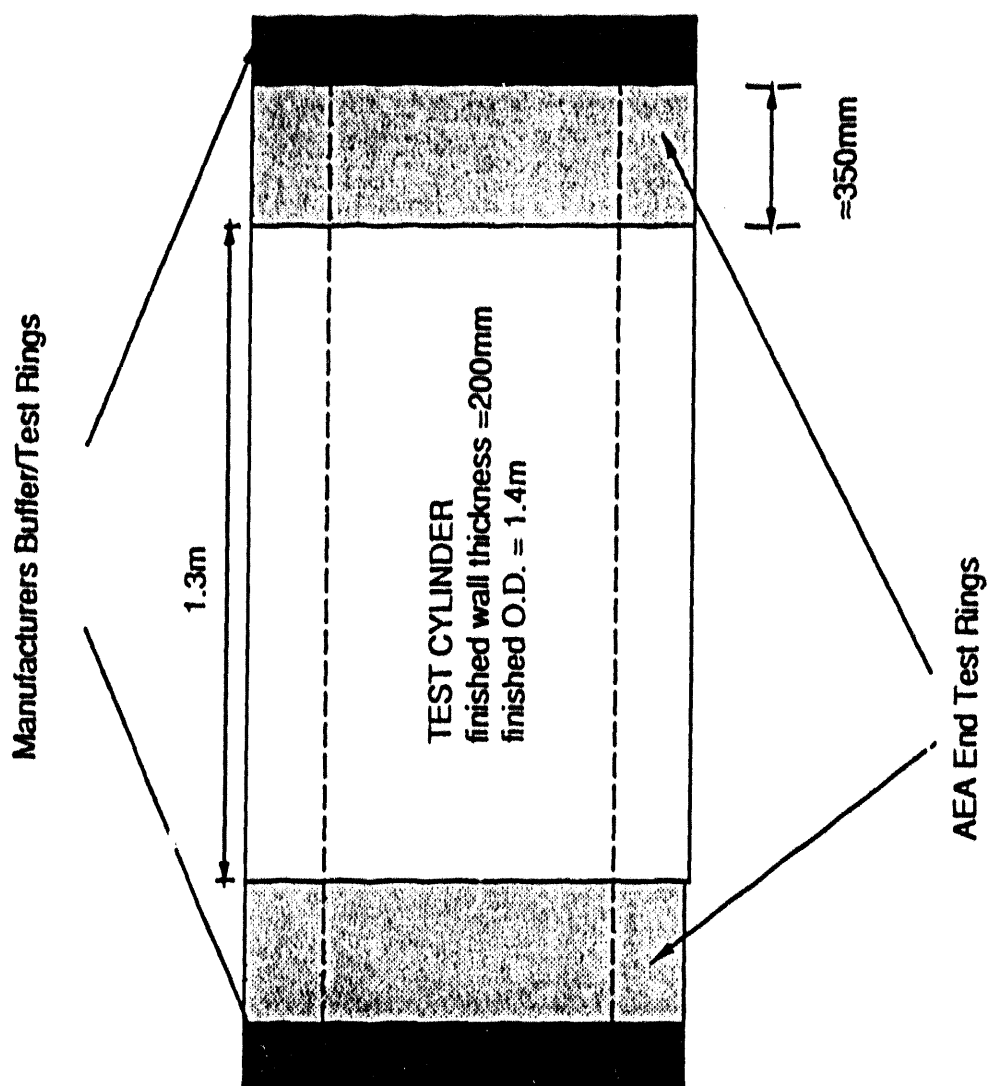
Location of SC-1 Test Cylinder within the large-scale forging
